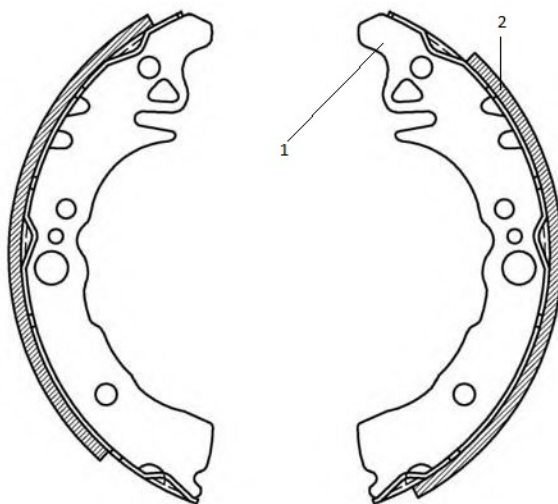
brake pads: 1 - metal base, 2 - pad
